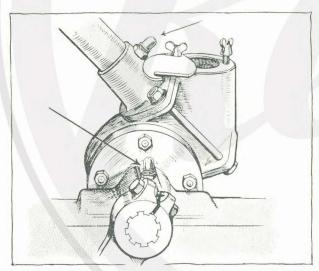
The Steering Gear Casing of the 14 H.P. "Standard" with the Filling Orifice Open.
